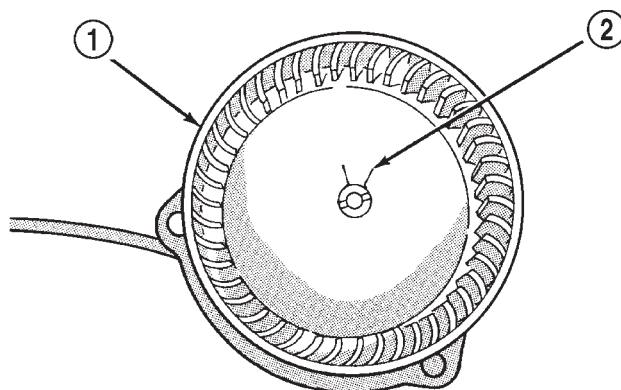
BLOWER MOTOR WHEEL REMOVE/INSTALL
